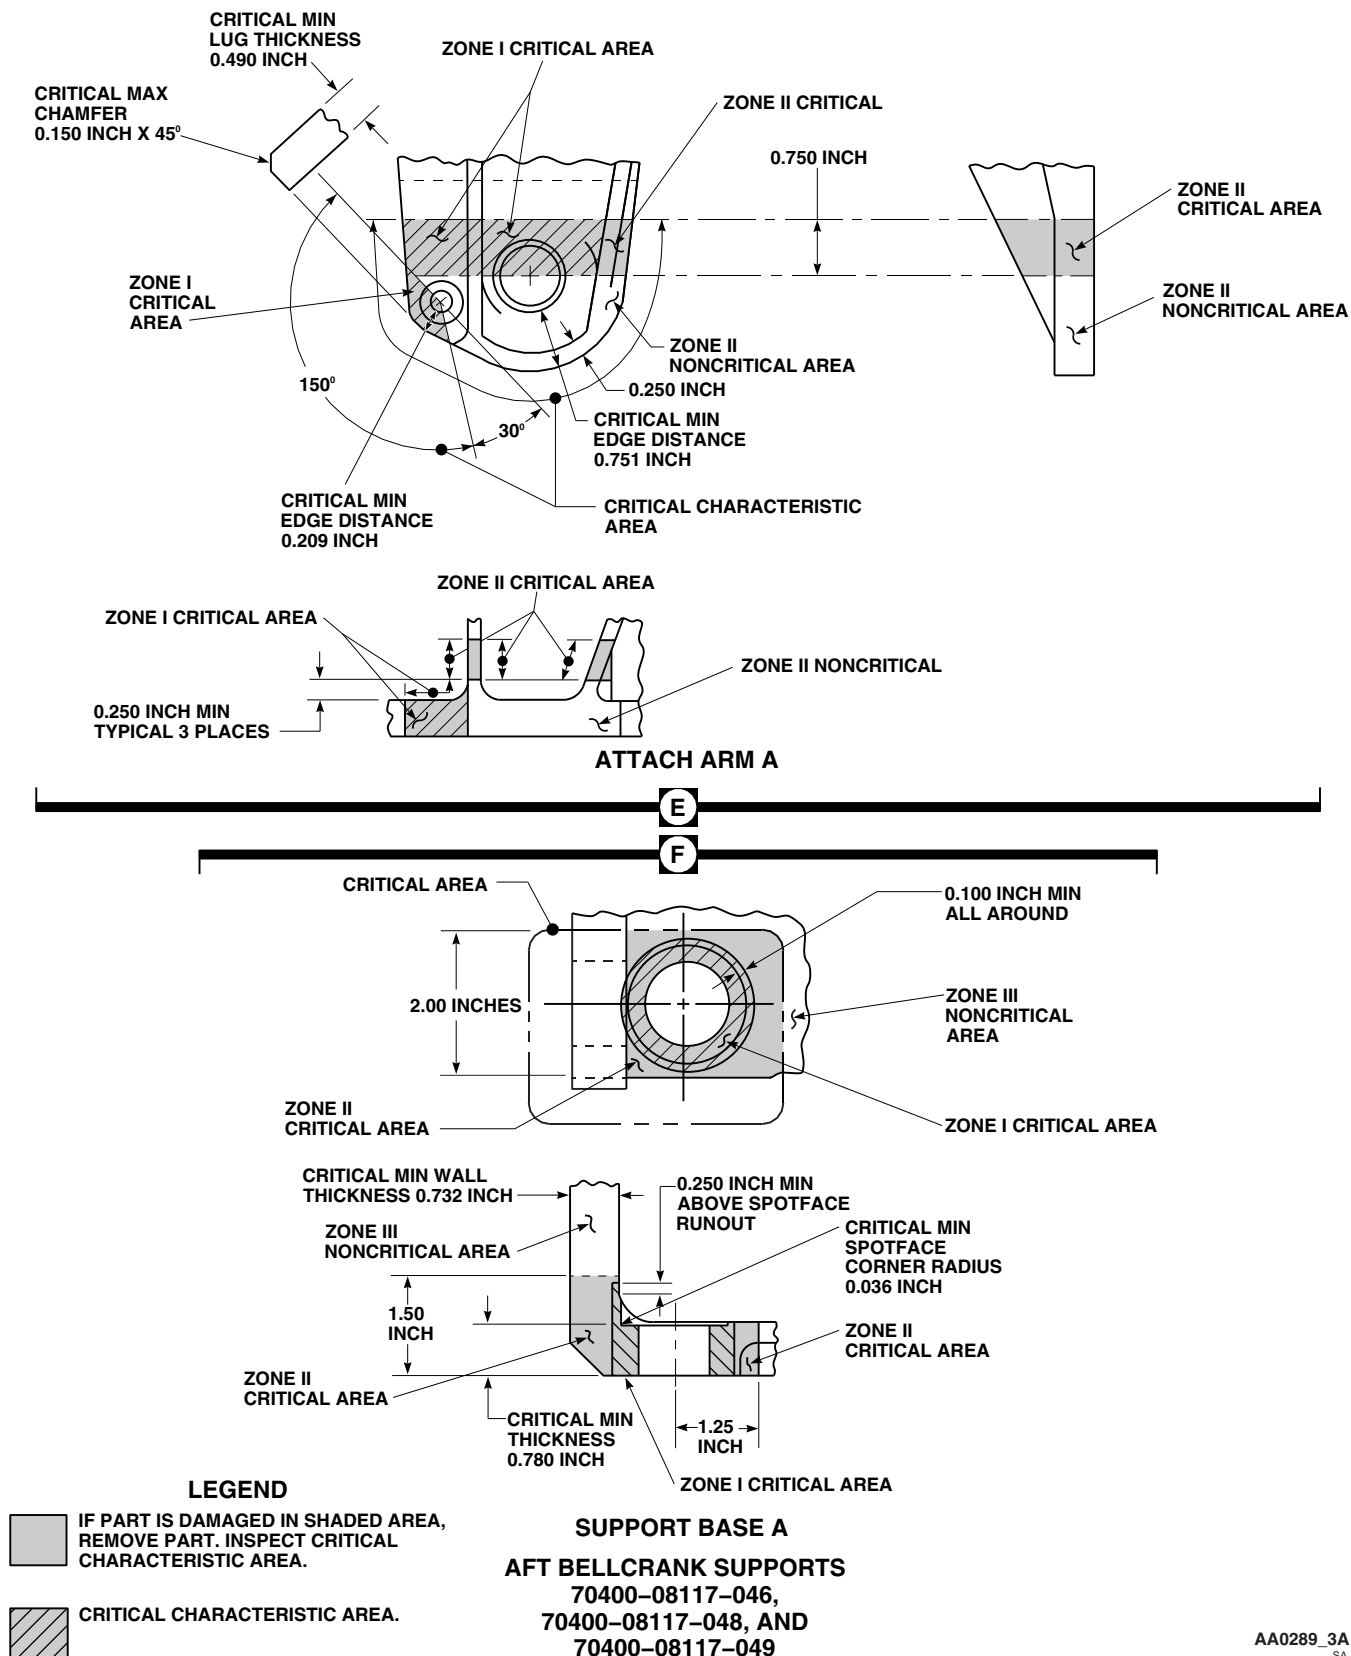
INSPECT AFT BELLCRANK SUPPORT (SHEET 3 OF 3)
